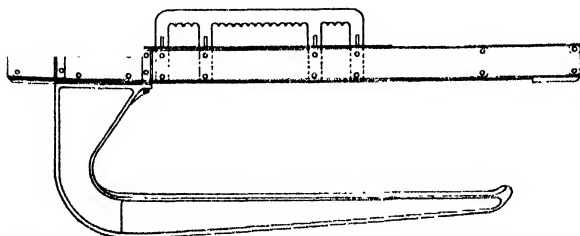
3. Open-type "C" hook for handling coiled rods and wire.
